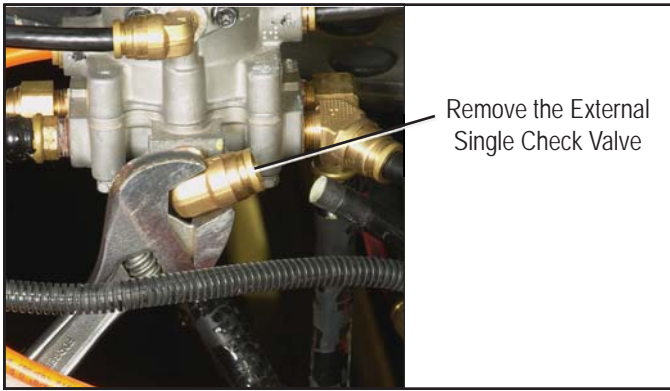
REMOVING THE EXTERNAL SINGLE CHECK VALVE
